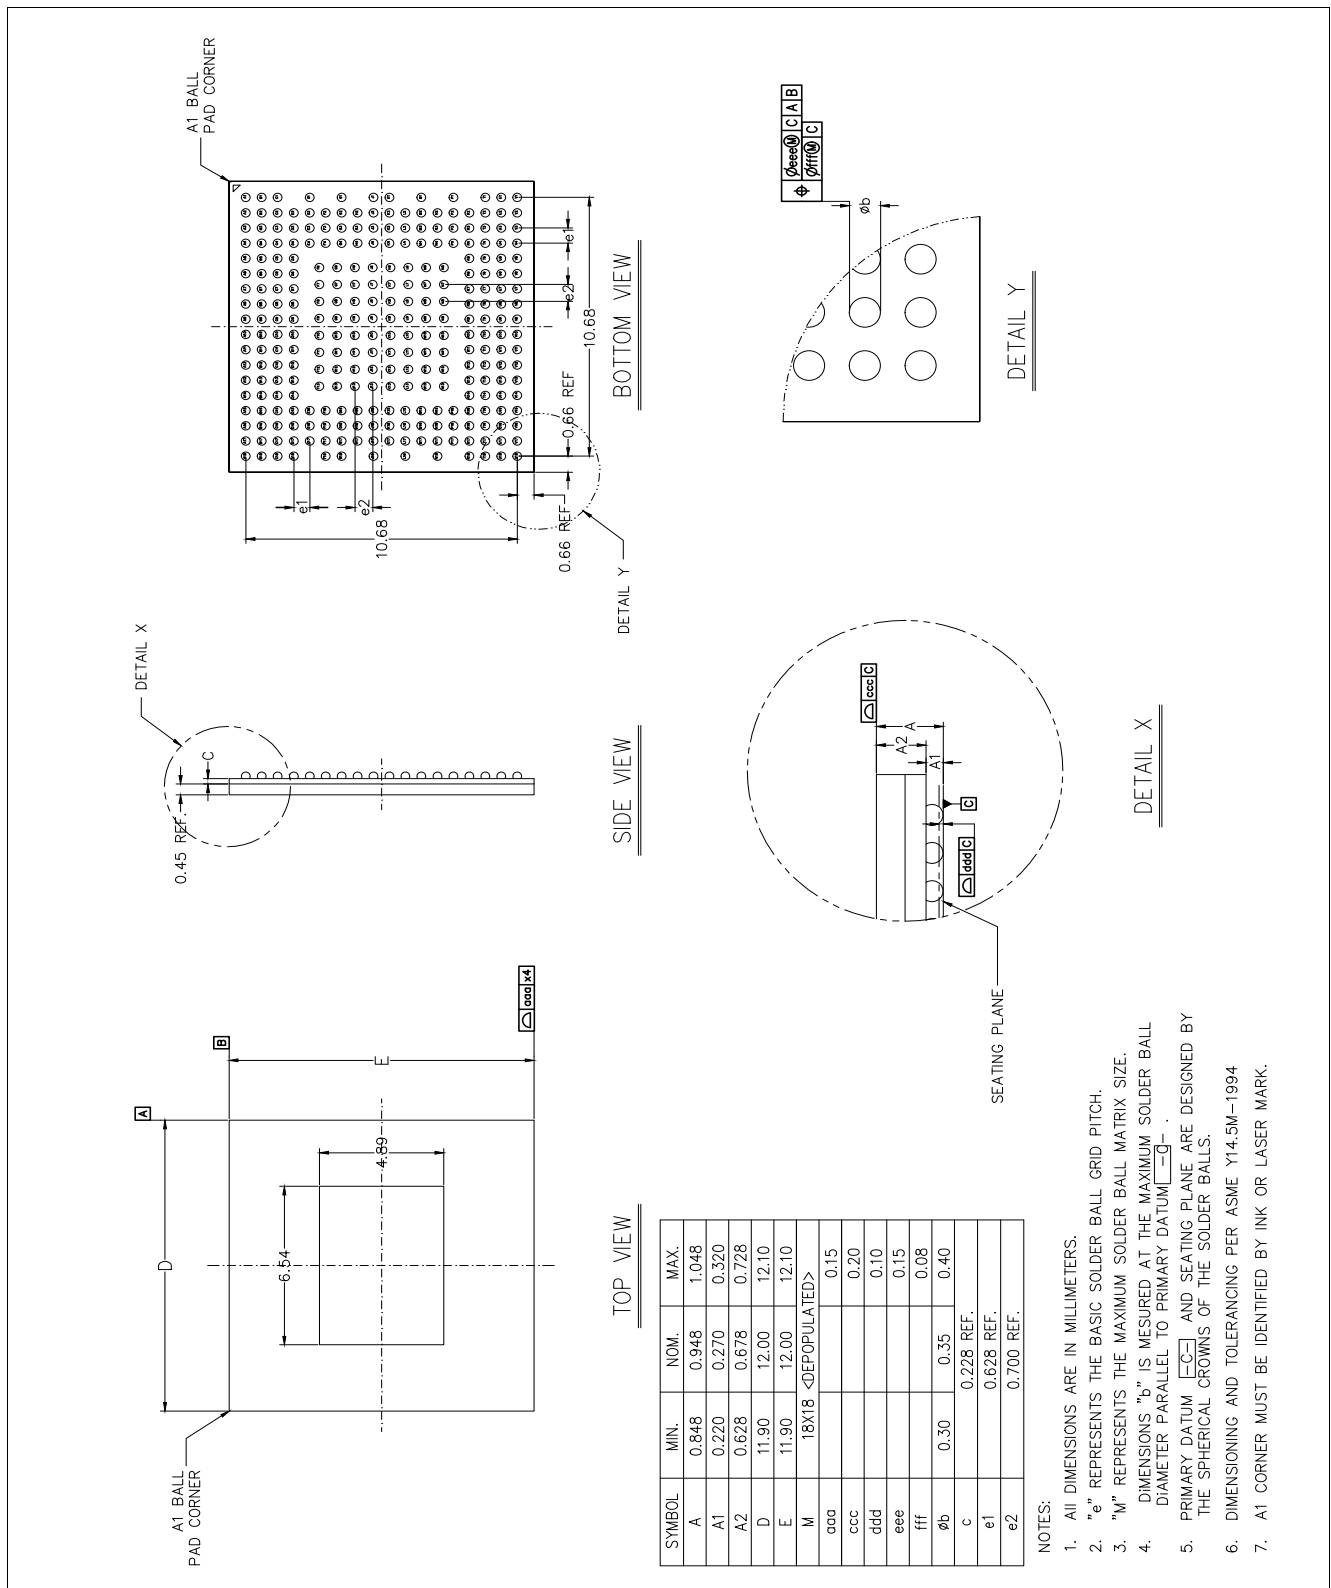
PG-FCLBGA-277 12 mm x 12 mm Package Outline
